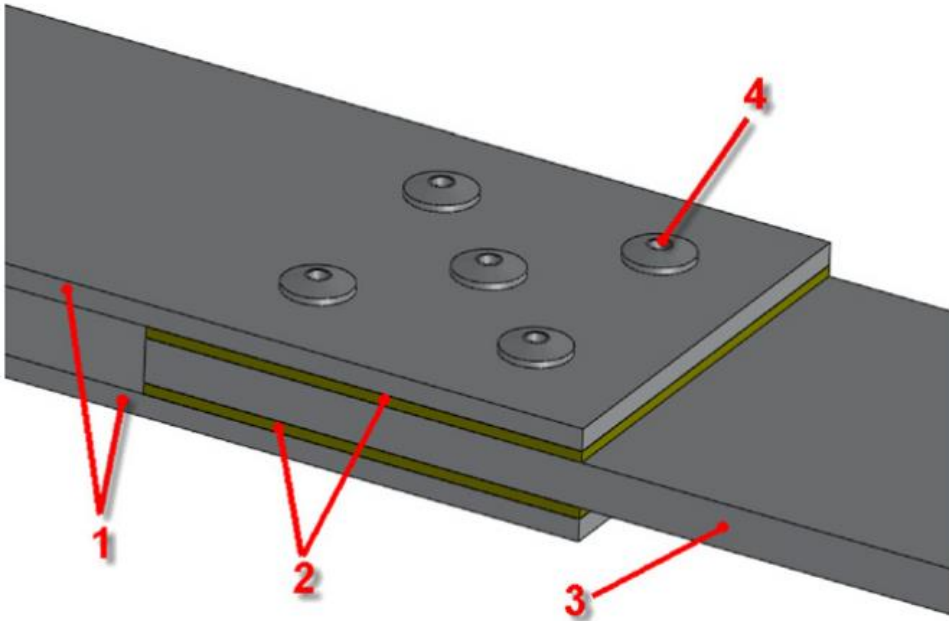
Hybrid joint; 1, 3- Aluminum plates; 2 - Adhesive layer; 4 – Rivet [28].
